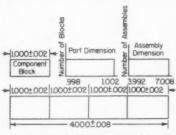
Limit dimensioning of fourblock assembly. Each block has a tolerance of ±0.002 in., and squareness is ignored for simplicity.
